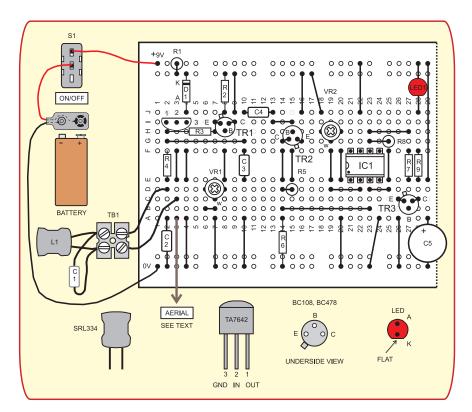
Assembly of the Lightning Detector on Protobloc
